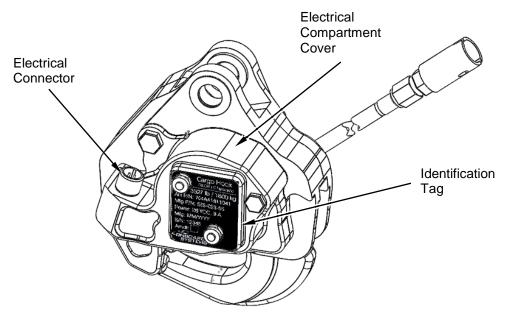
Cargo Hook Slave Cylinder Assembly - Electrical Release Side
